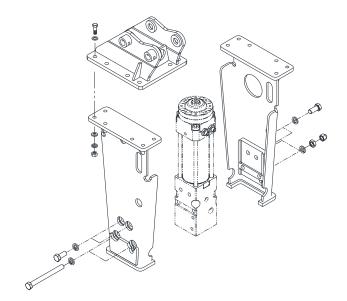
Housing Plates, Mounting Bracket & Hardware
